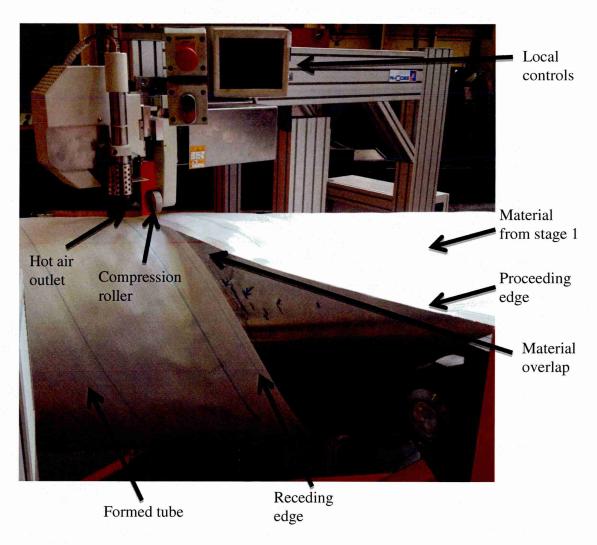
Stage 2 – Hot Air Welding Unit
